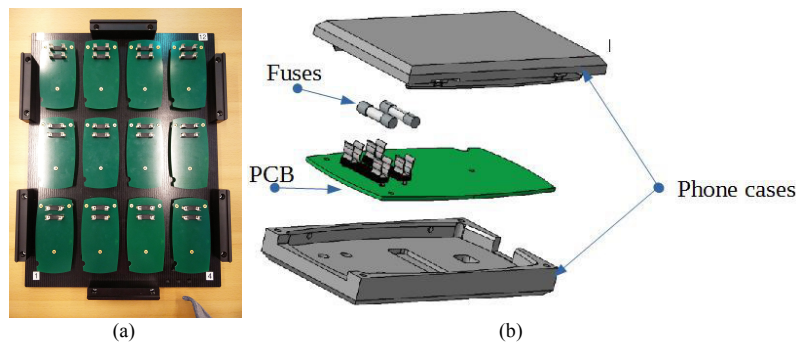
(a) Tray containing the 12 PCB. (b) Assembly of the phone.
